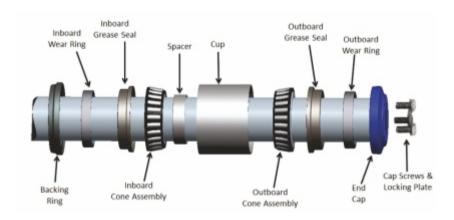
Exploded View of Cartridge Tapered Roller Bearinga
